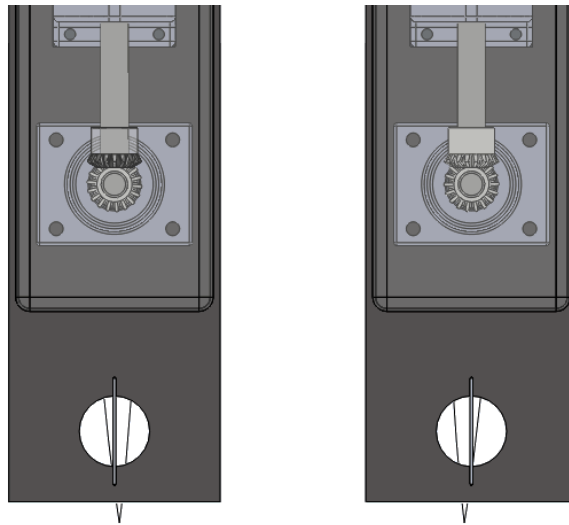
Top view of Positioning tool used to locate the flippers (shown as off center for emphasis)
